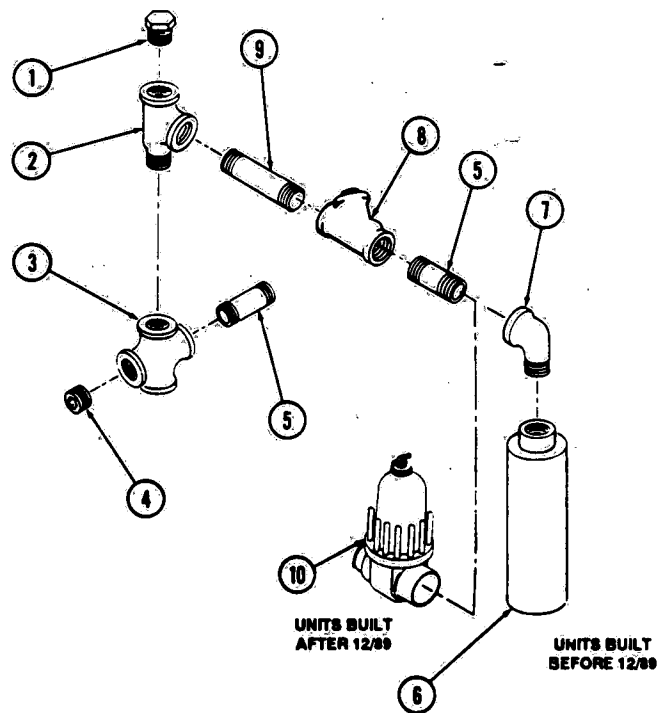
AIR FILTER ASSEMBLY - Gravity
